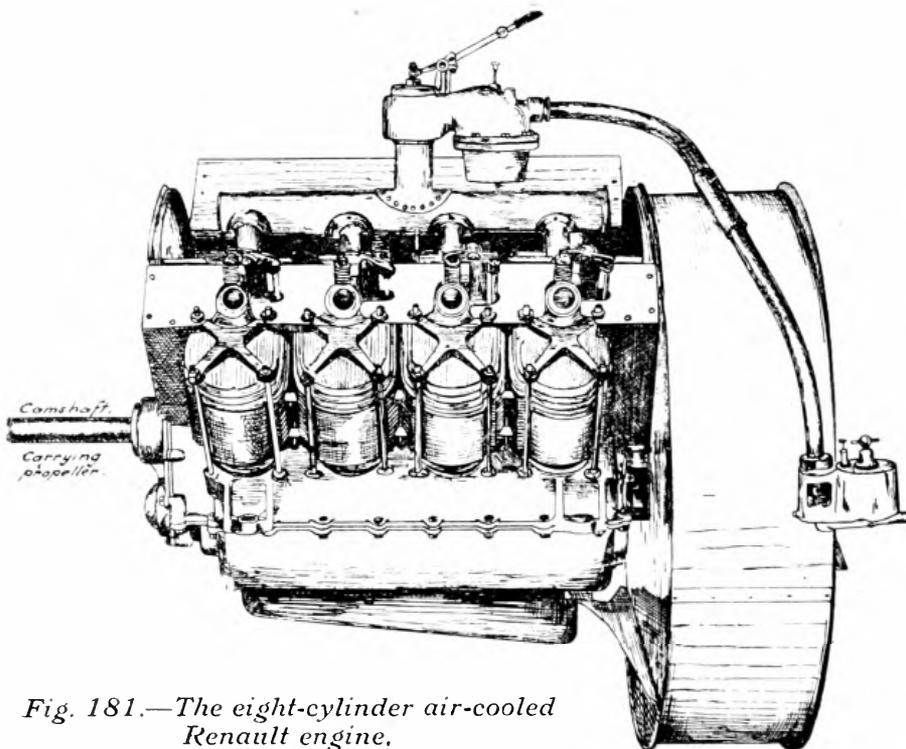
The eight-cylinder air-cooled Renault engine.
